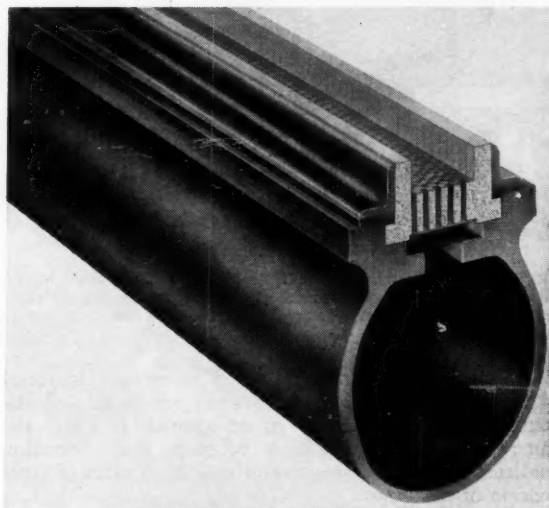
Section through ribbon burner of the type used in flame-impingement method of heat processing
